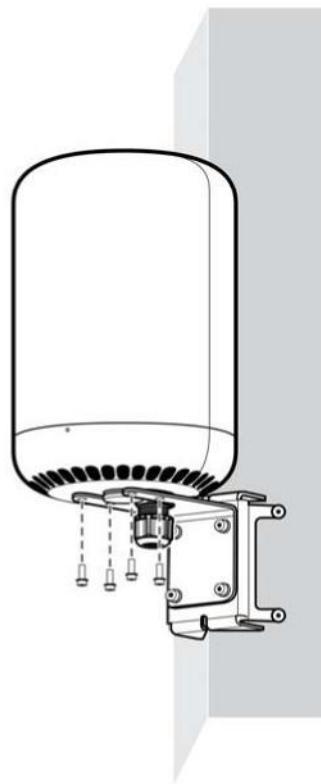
FastMile 5G mmWave Receiver in placed on the bracket
